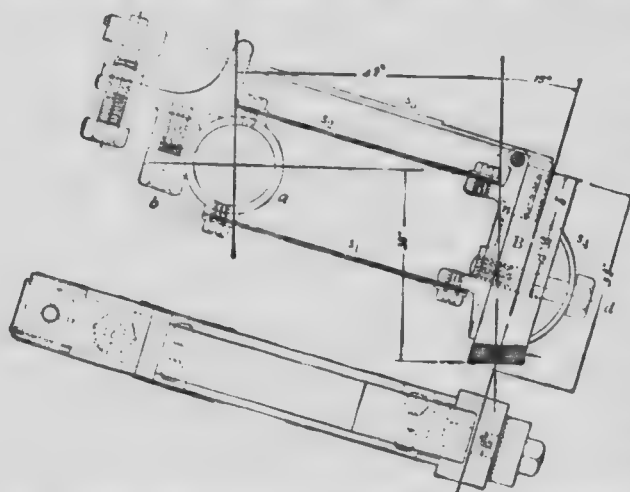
Details of Dick, Kerr and Co.'s Carbon Brush Holder for Large Machines.
